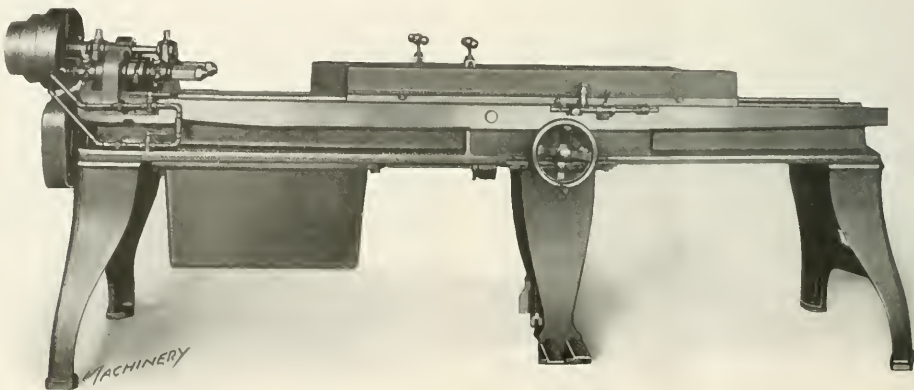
Rifle Barrel Reaming Machine built by the Diamond Machine Co.
